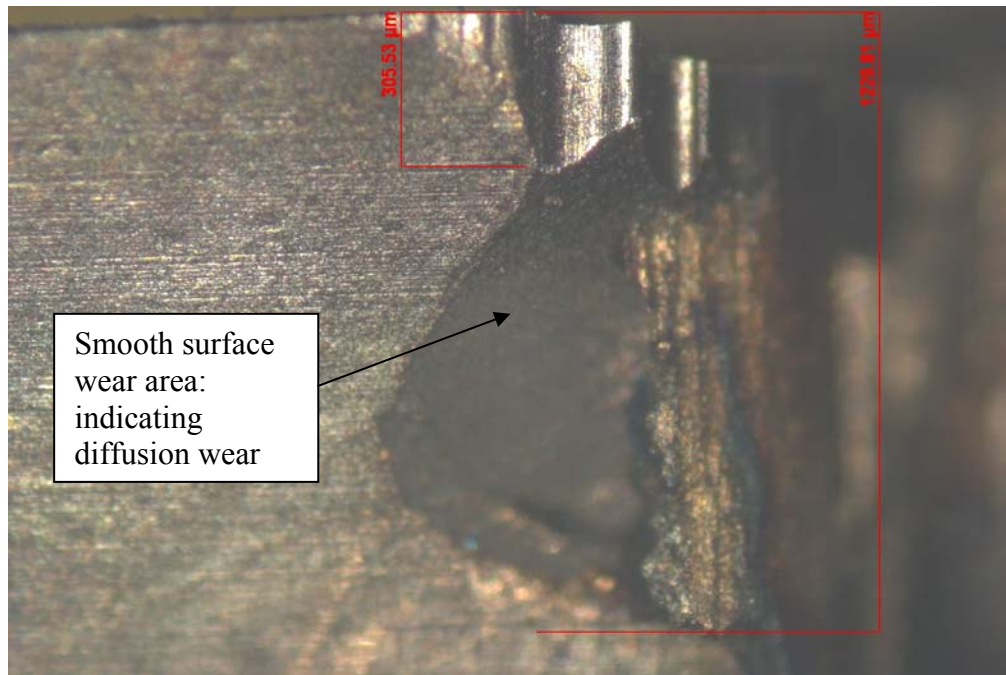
Diffusion wear on the minor cutting edge of the cutting tool.
